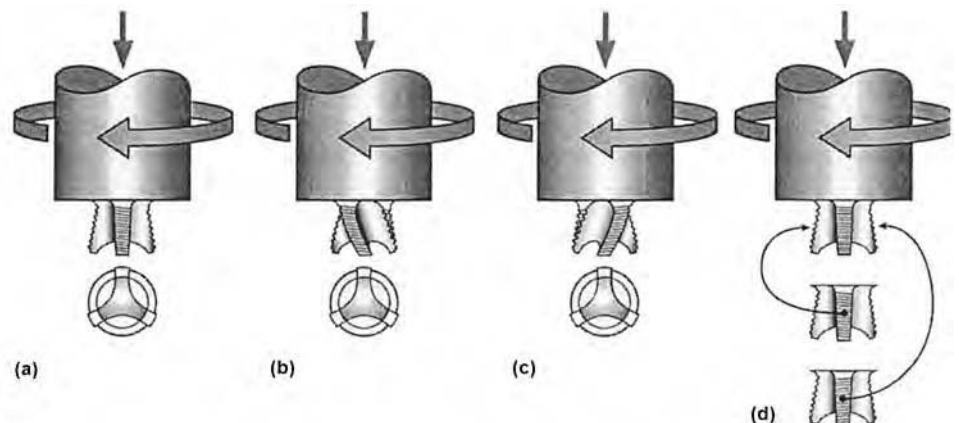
Flared Triflute tool used for lap welding of aluminum. Source: Ref 39
